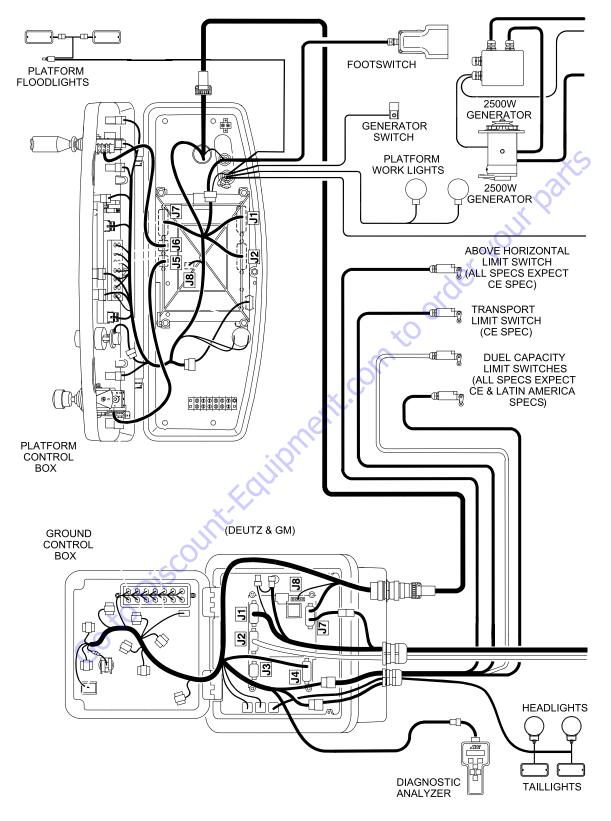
Electrical Components Installation (Without UGM) - Sheet 1 of 2
